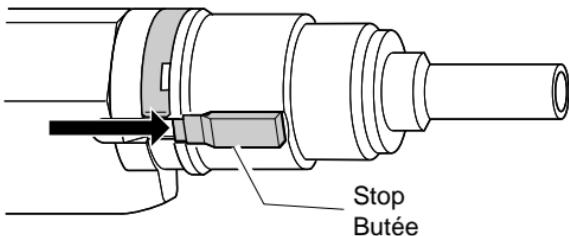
Inserting Barrel Assembly into Outer Liner Assembly
